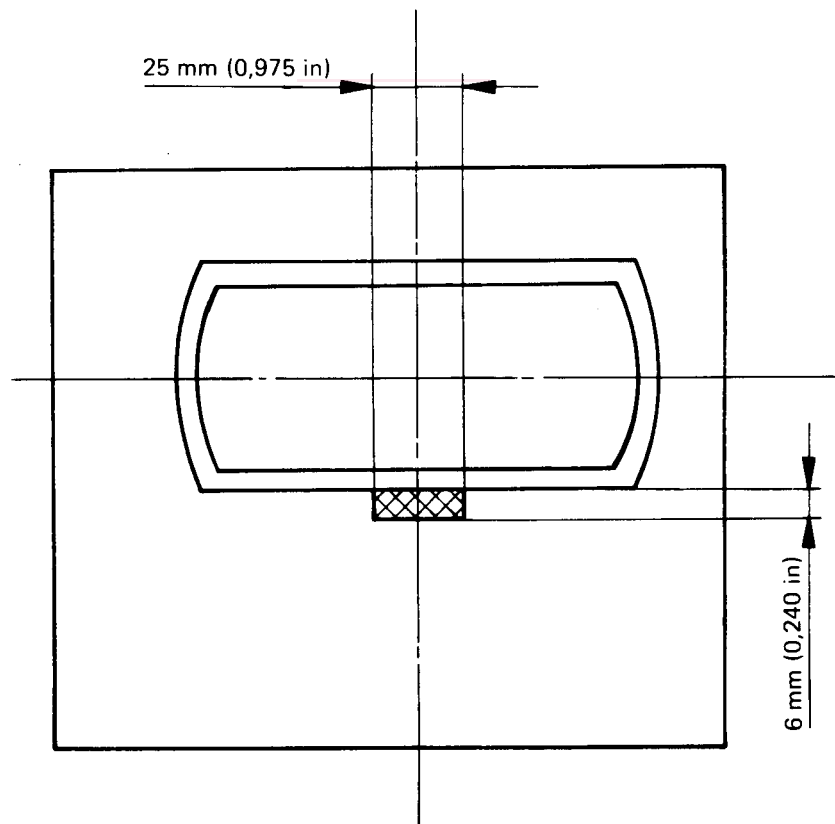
Bottom view of bottom corner fitting showing contact area (shaded) for misgather (push-up) load
